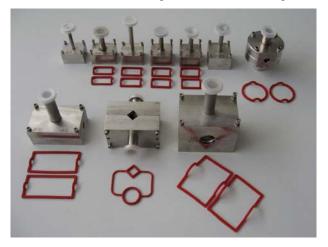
Set of solid test chambers for leak testing of weld seams
